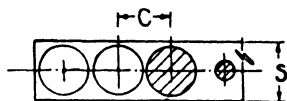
This is a wasteful scrap-strip design for cutting round blanks.
